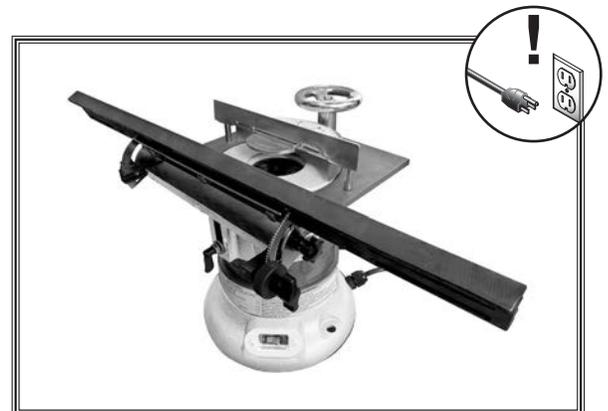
Pivot support and slide table assembly properly attached to grinder.
